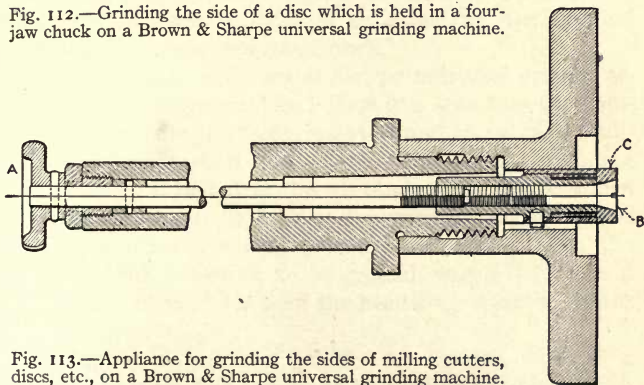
Appliance for grinding the sides of milling cutters, discs, etc., on a Brown & Sharpe universal grinding machine.
